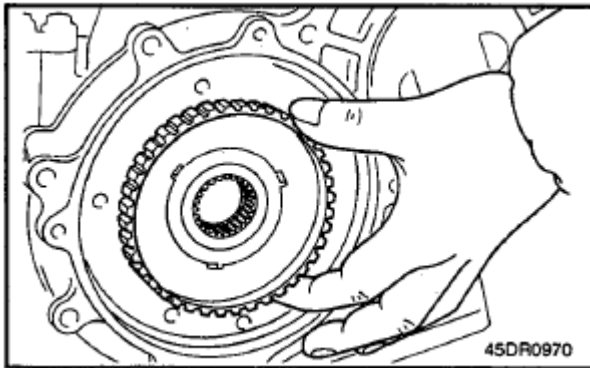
Removing End Clutch Hub & Thrust Bearing
